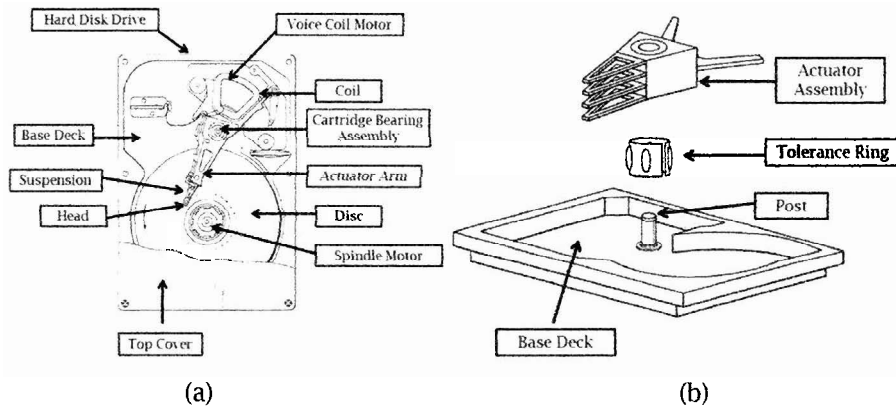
Hard disk drive. (a) Top plan view, (b) Exploded view.
